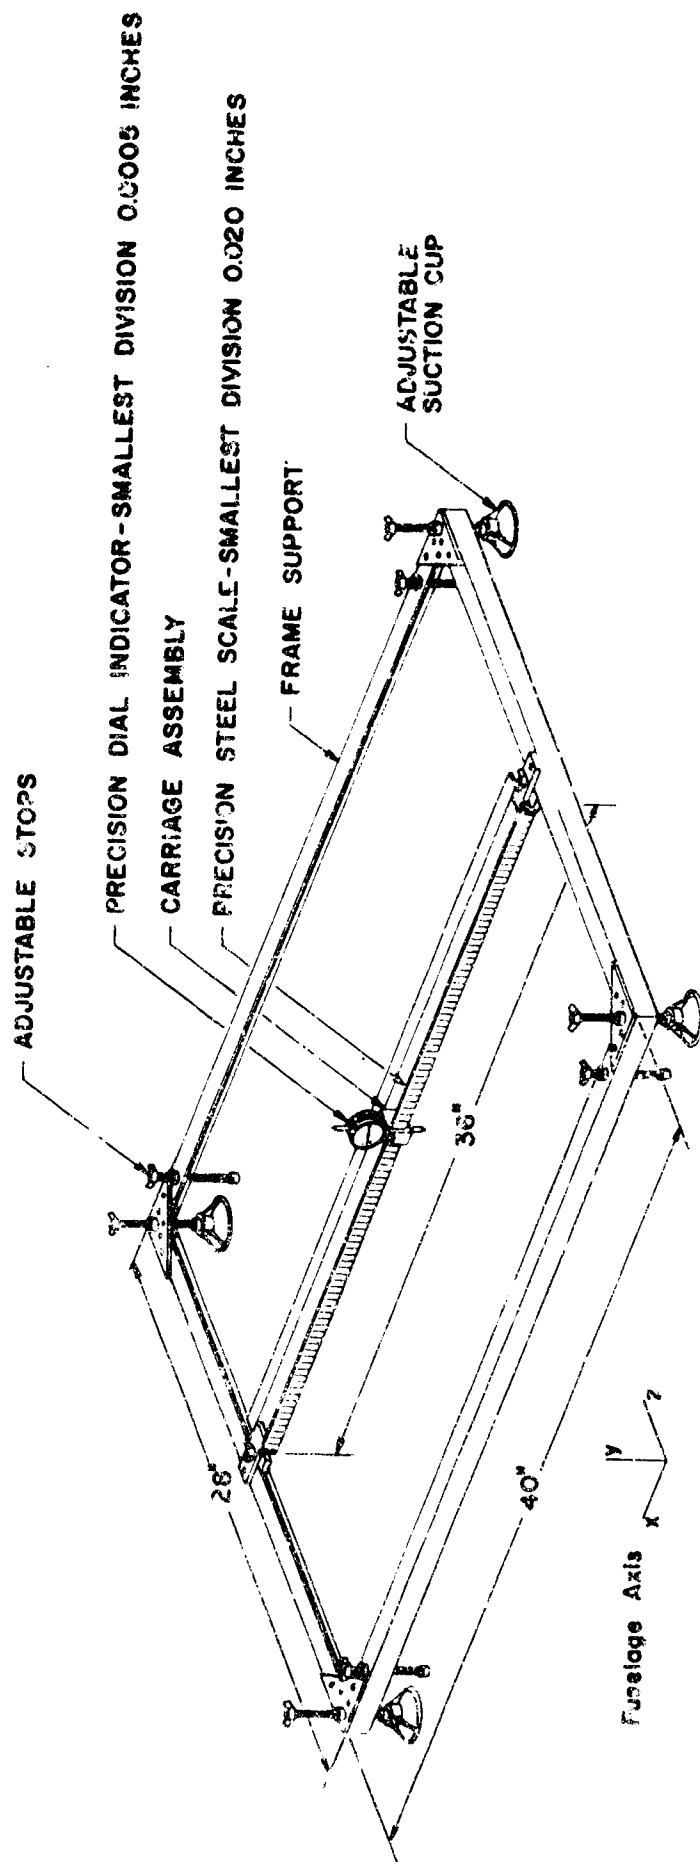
THE ASSEMBLY USED TO MEASURE SKIN DEFORMATIONS ON THE TYPE C AIRCRAFT
